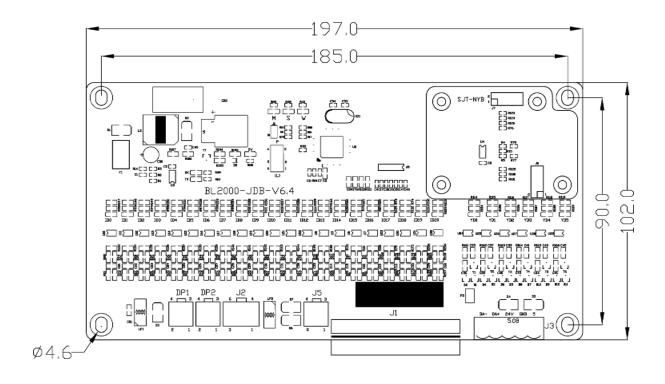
Component location and dimension of BL2000-JDB-V6.4
